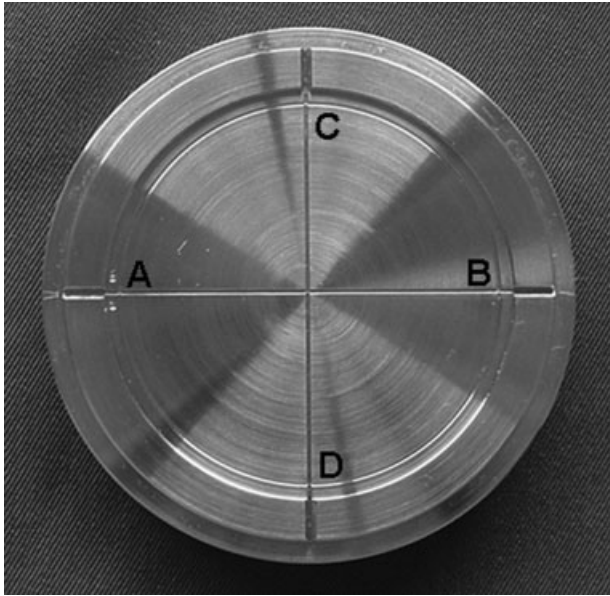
Master die dimensions. AB = CD = 45.736 mm
